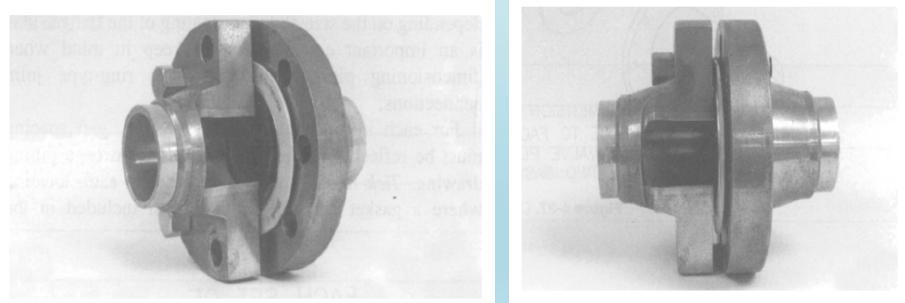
Flat ring gasket and flange. Courtesy of Flexitallic, Inc.
